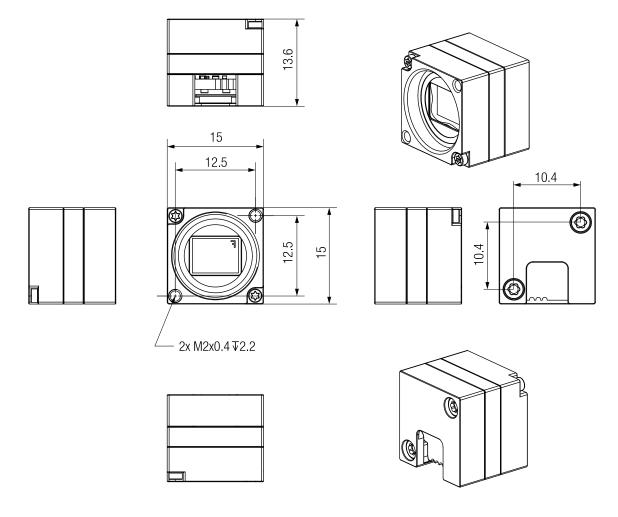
Dimensional drawing of MU196xR-ON with ADPT-MU-CX3-UC adapter
